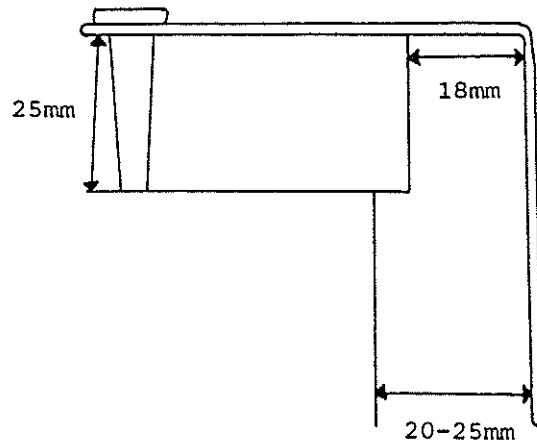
Reconstruction of half joint from coffin T83 J9 F15.
